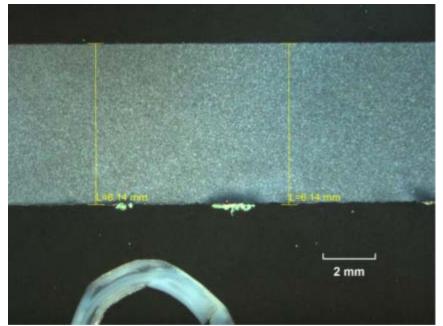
Cross Section of Coupon 10 at Area of Maximum Wall Loss
